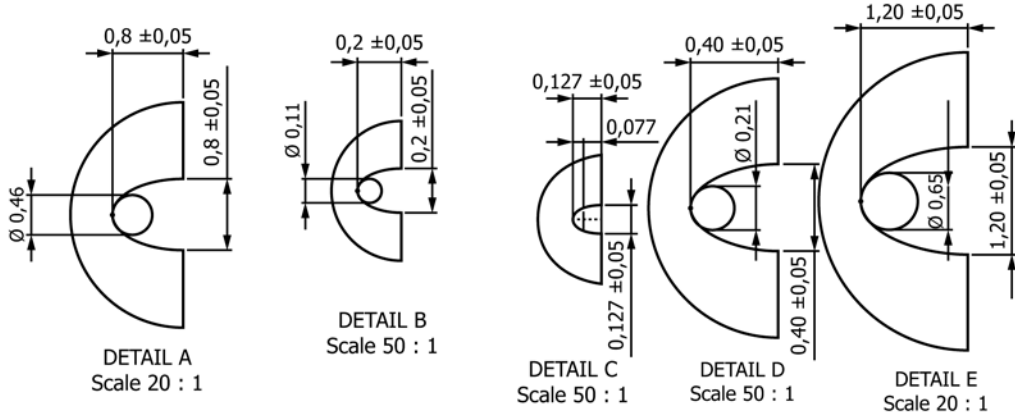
Drawing of F-Groove Wedge for Light Metals
